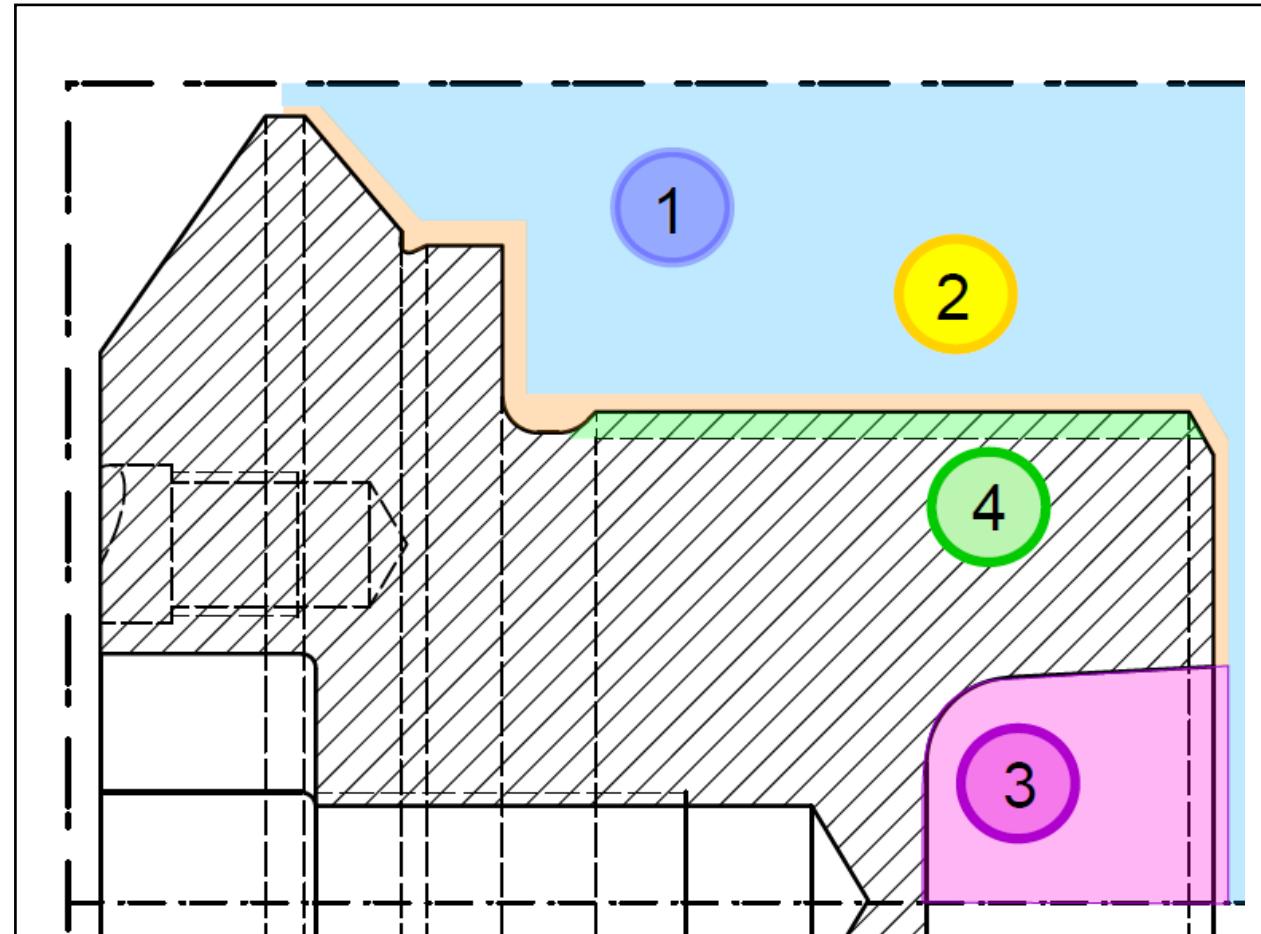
Operation 1 of locking bolt machining: 1) roughing 2) finishing and contouring 3) bottom pocket machining 4) external thread turning.
